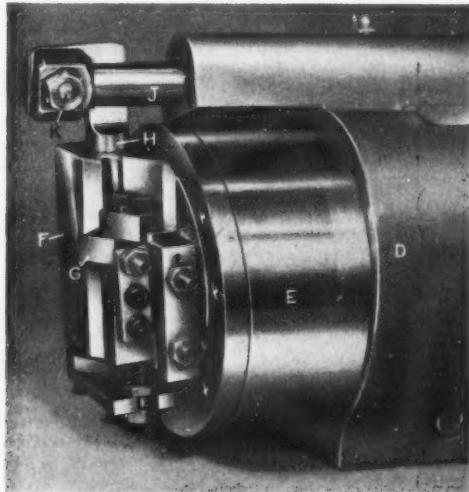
Close-up view of the angular facing attachment removed from the machine
